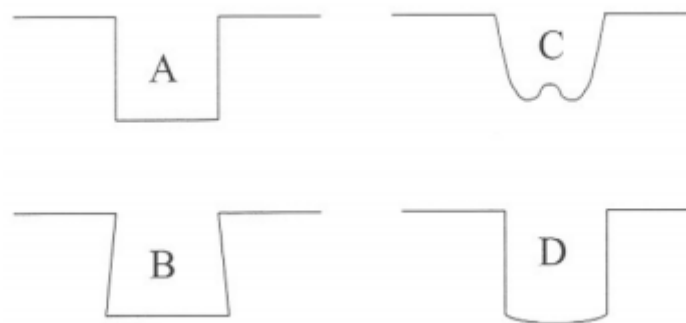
Geometry of the hole made from different technology by Flaman: A high-speed drilling; B low-speed drilling; C abrasive jet machining; D electro-chemical machining.
